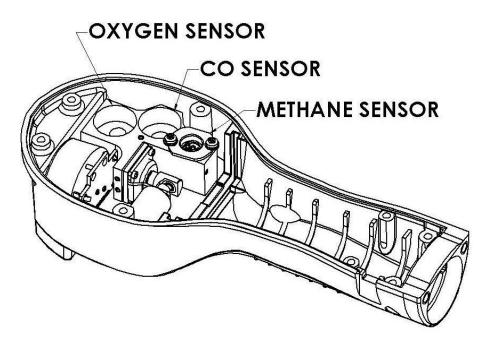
Gas-Rover II with top of case and main circuit board removed.
